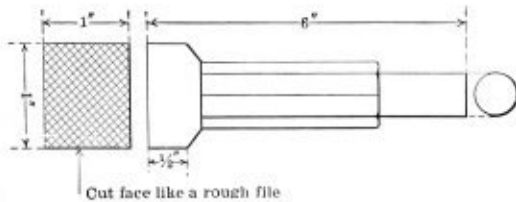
Scaling Tool Made to Fit Pneumatic Chipping Hammer
